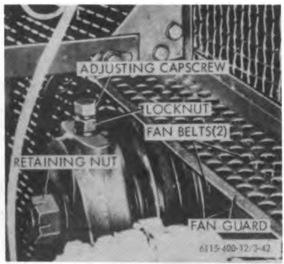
Fan belt, removal and installation. 3-51. Fan and Fan Hub
